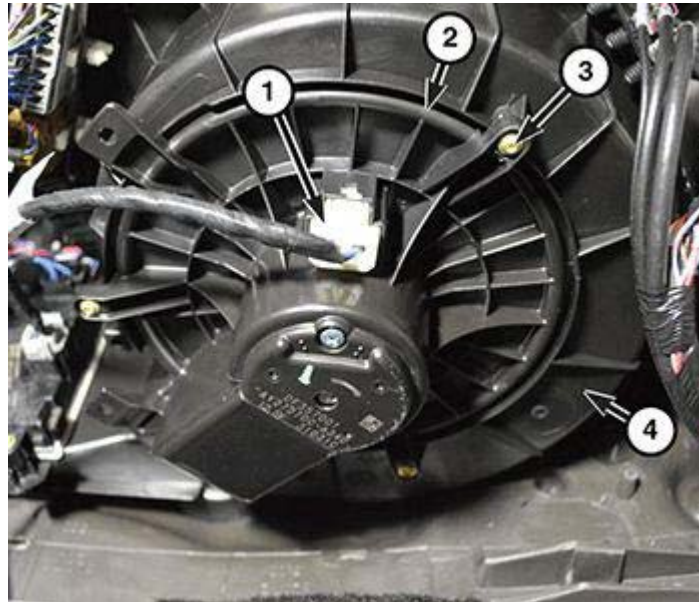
Wire Harness Connector, Blower Motor, Screws & HVAC Housing
